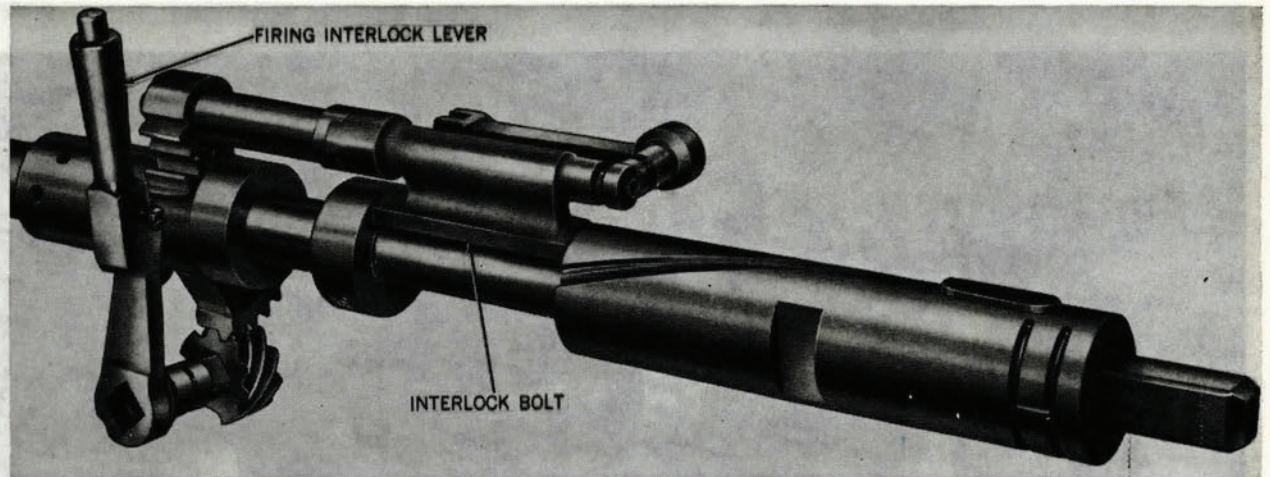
Interlock Slide—Muzzle Door Open—Firing Interlock at TUBE READY TO FIRE.
